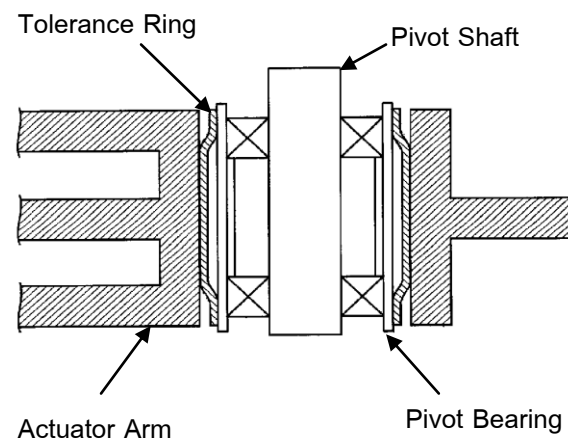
Illustrate the pivot bearing assembly using tolerance ring
